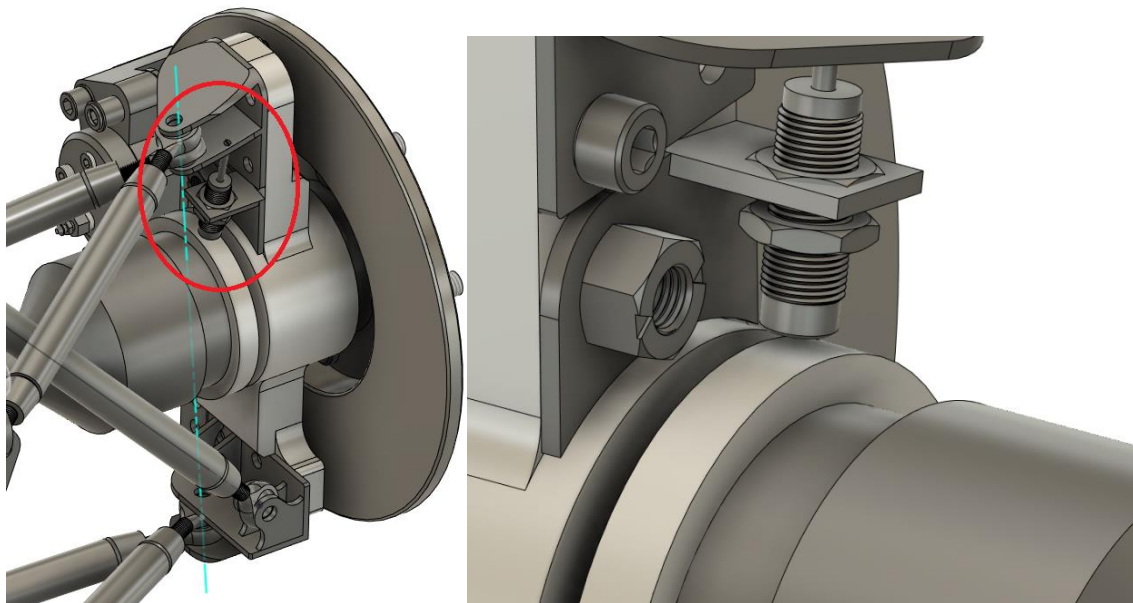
Virginia Motorsports' FSAE car's hall effect sensor mounting.
